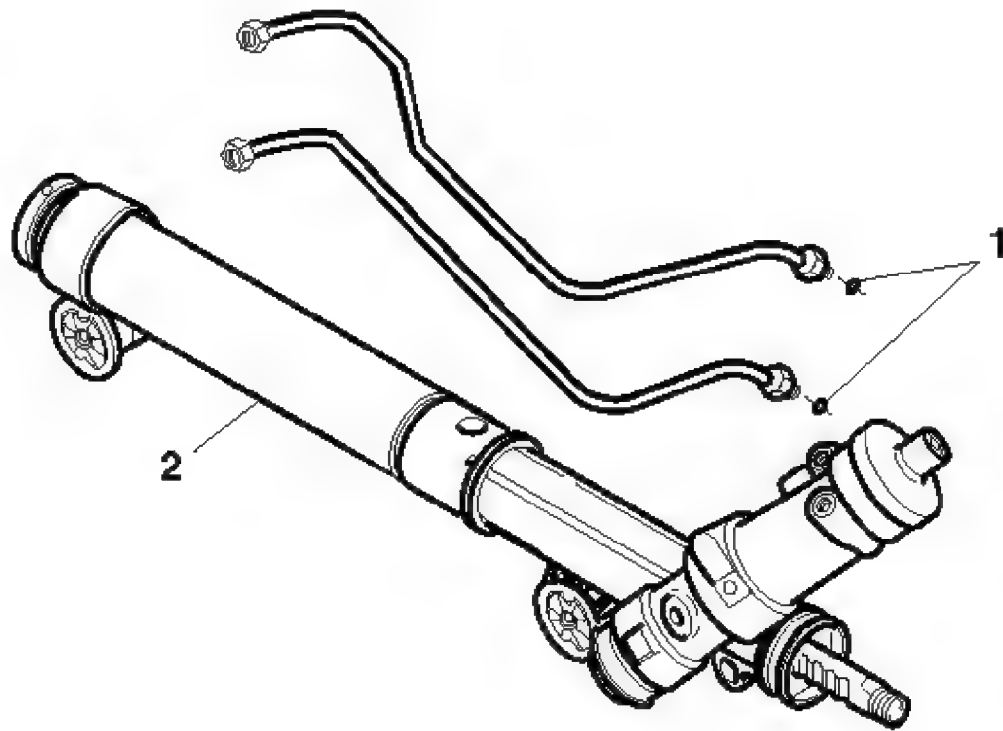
View Of O-Ring Seals At Valve End Of Lines (Quiet Valve)
